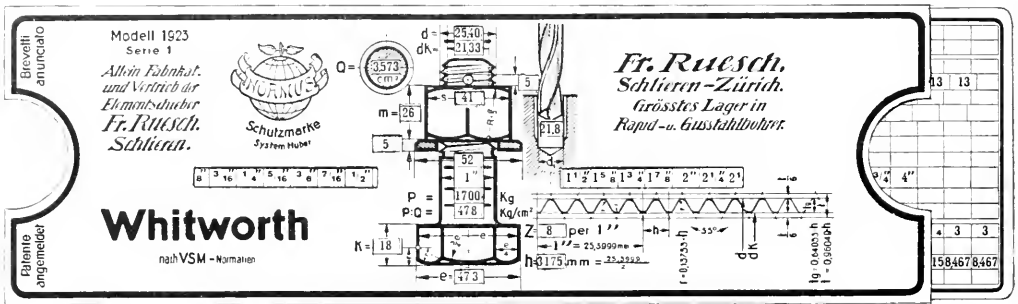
GRAPHIC SLIDE RULE FOR OBTAINING DIMENSIONS OF STANDARD PARTS (FRONT SIDE)
